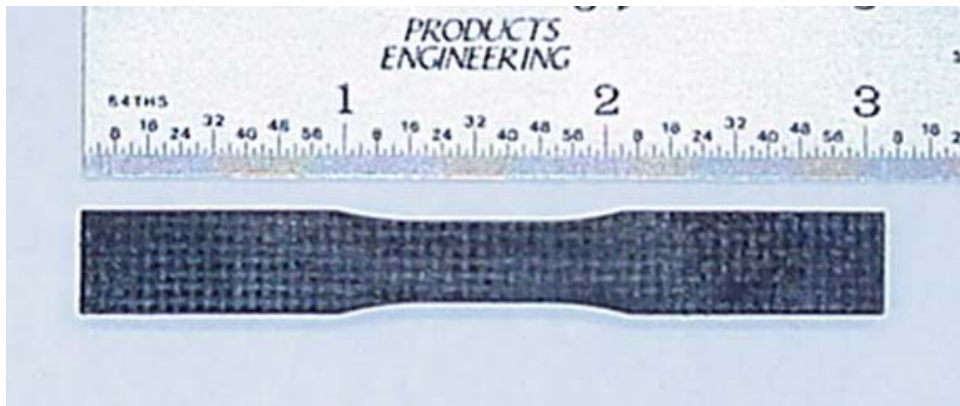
Manufactured Test Specimen (scale is in inches)
